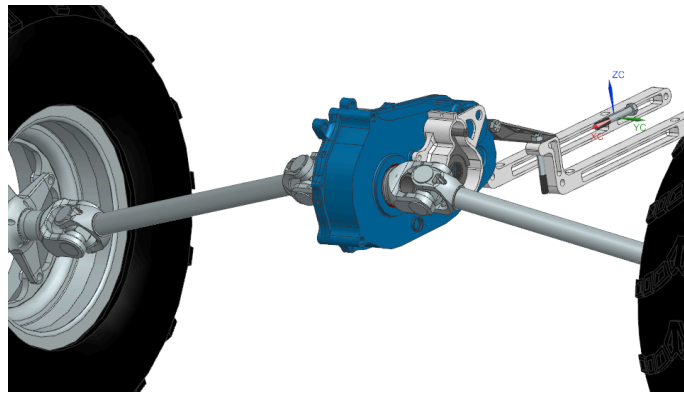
Custom drive shafts developed by the MBR Team. The drive shafts consist of an outboard u-joint that splines to the center of the wheel and an inboard u-joint.
